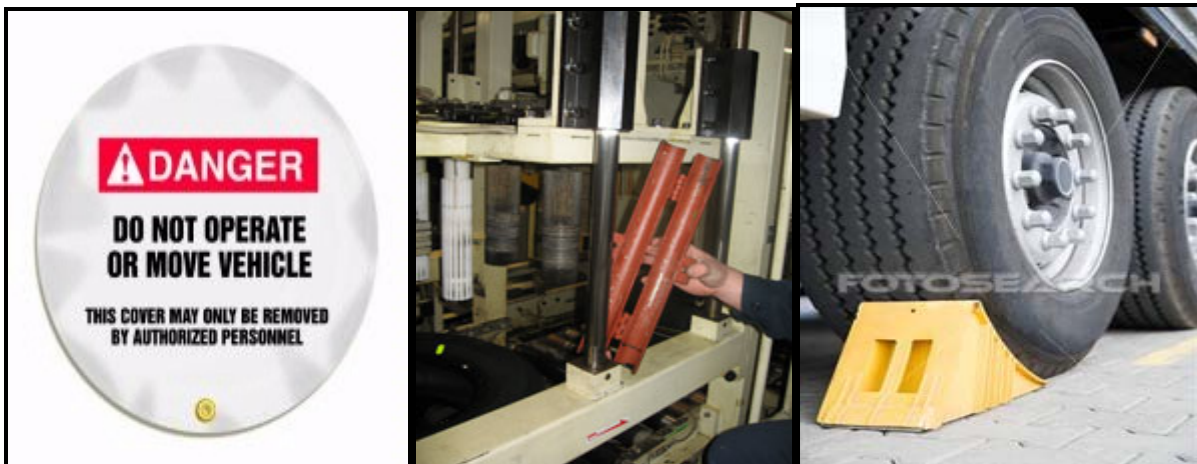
(From left: Steering Wheel Locking Cover (photo 1); Installing a Machine Block (photo 2); Wheel Chock Prevents Rolling (photo 3)
